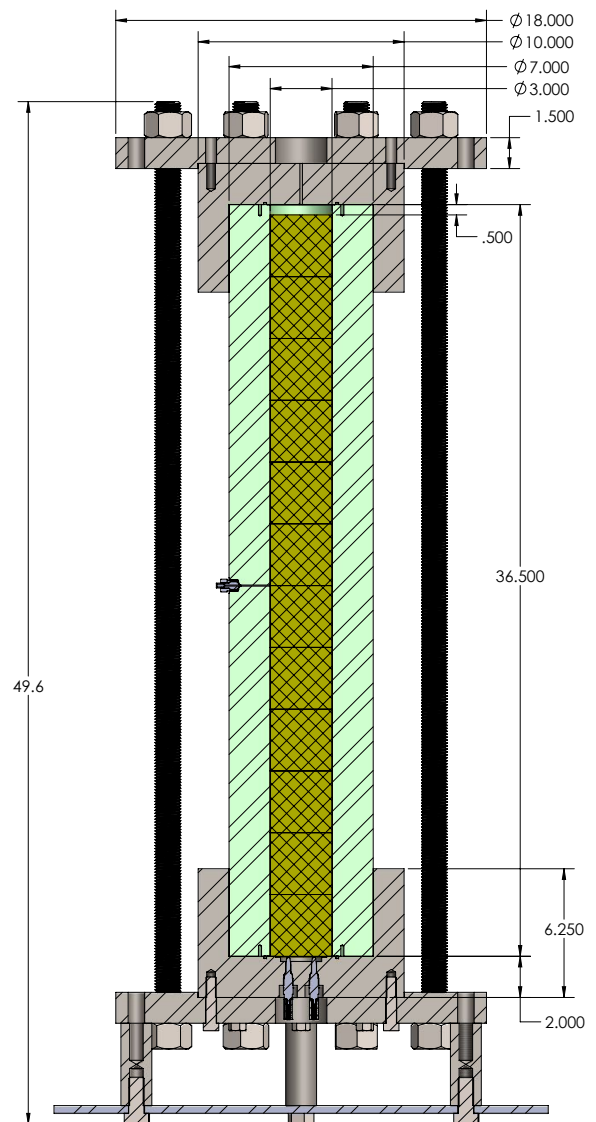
Cross-section drawing showing the primary dimensions relevant to confinement design, in inches.
